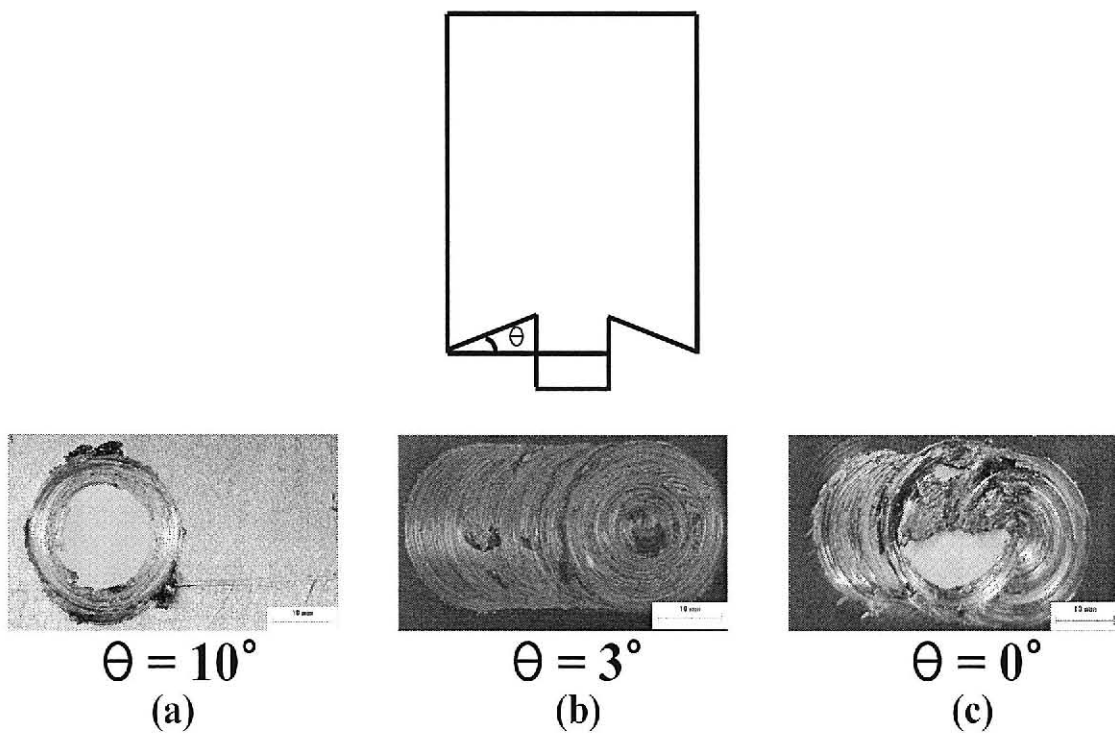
Appearance of friction stir welded specimen at 150rpm and 100mm/min with various recessed angles of the shoulder surface: (a) 10° , (b) 3° , (c) 0° .
